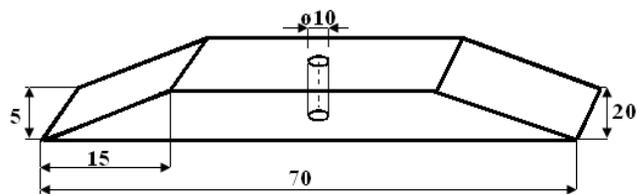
The shape and dimensions of a specimen used for examination of thermal shock resistance of the material; the central opening was used for mounting the specimen on a special holder integrated with the rotational boom arm
